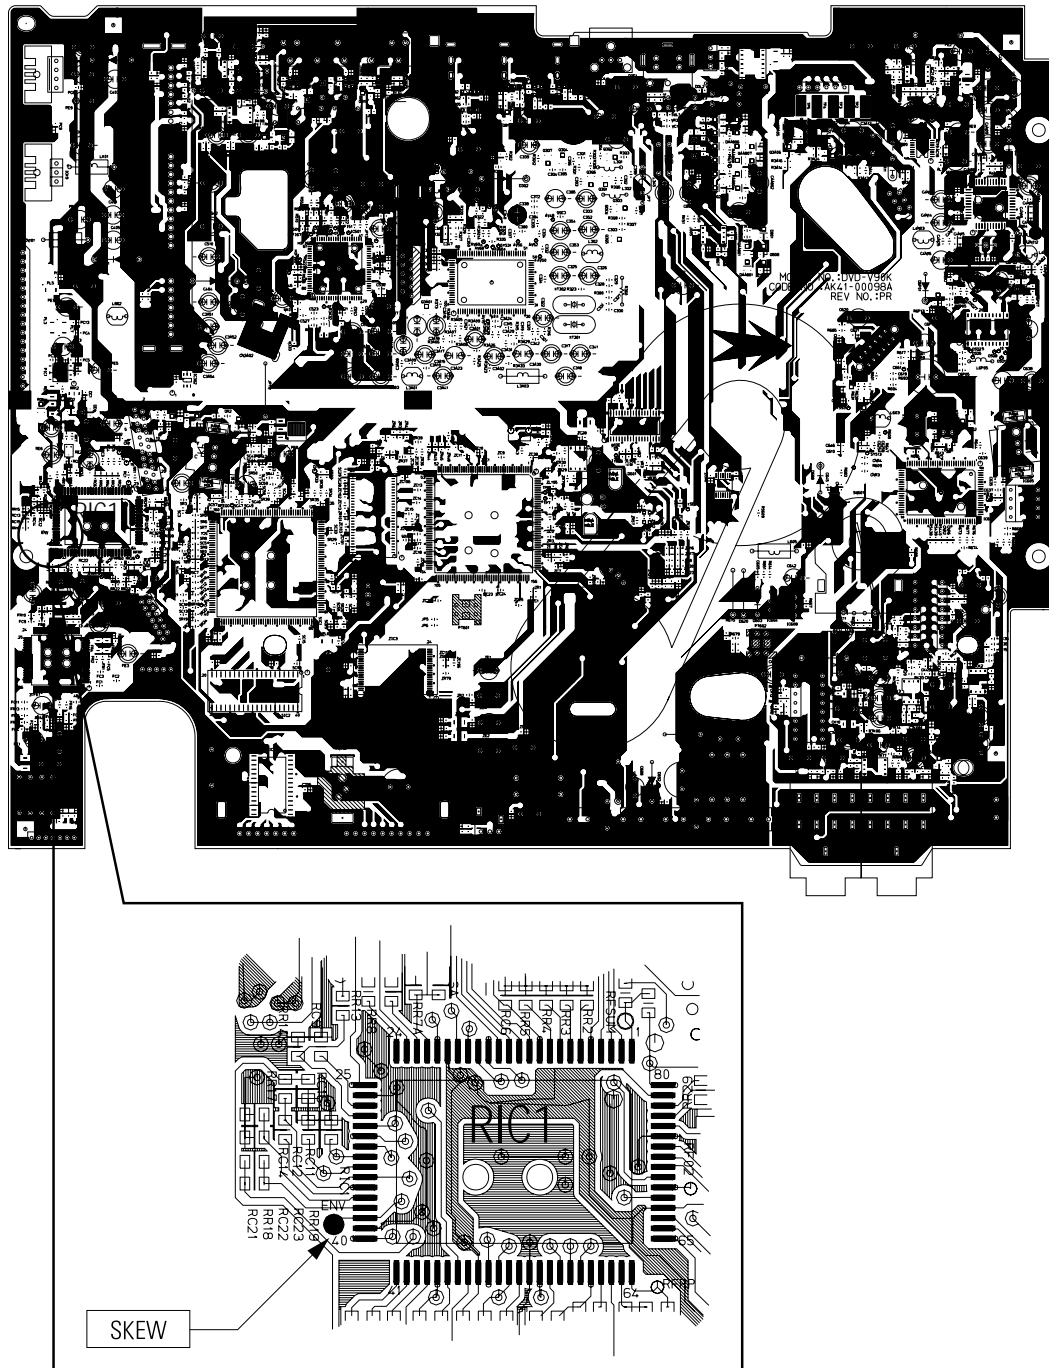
Location of test Point (Main PCB - Top Side)
